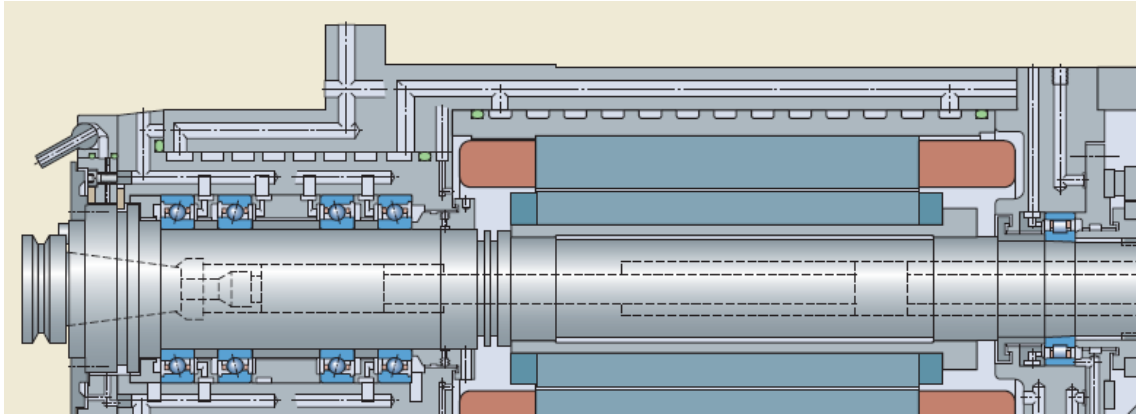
Integral spindle for machining center (SKF, 2014, p. 62)
